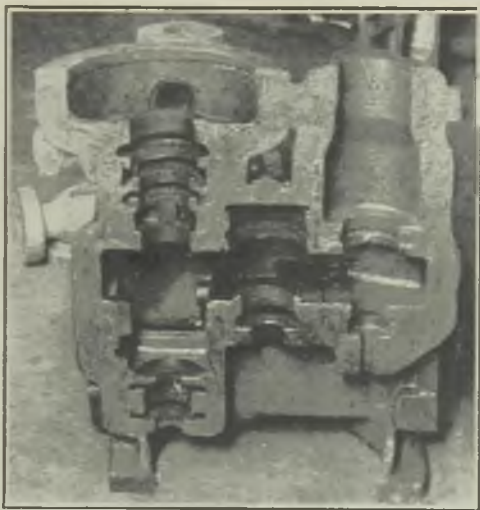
INTERNAL ASPECT OF A GEAR-CASE CASTING.
